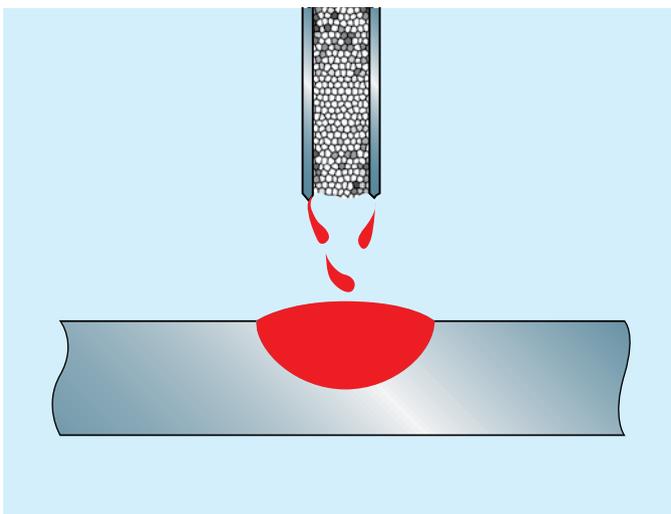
Metal Transfer in Flux Cored Arc Welding
